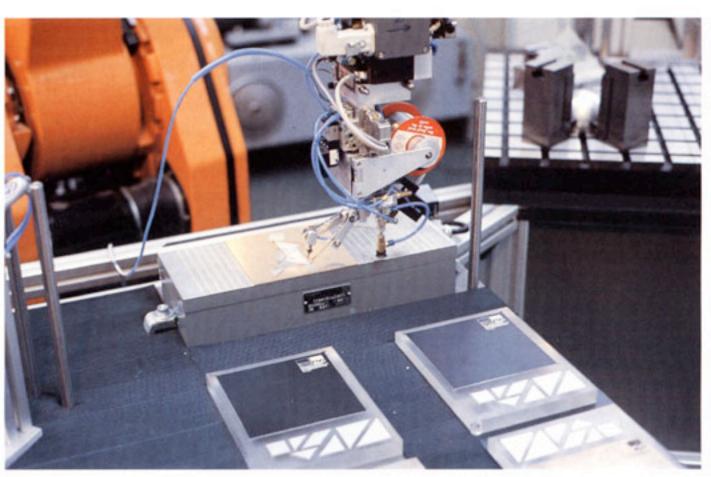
A. The Solder Wire - Flame Handling System LA-1000 is for "spot" soldering. Flame handling unit with "A" timer on left side. Solder wire handling- and feeding unit with "B" & "C" timers on the right side. Solder wire spool on the right of the "B-C" timer head. Special literature on request.
